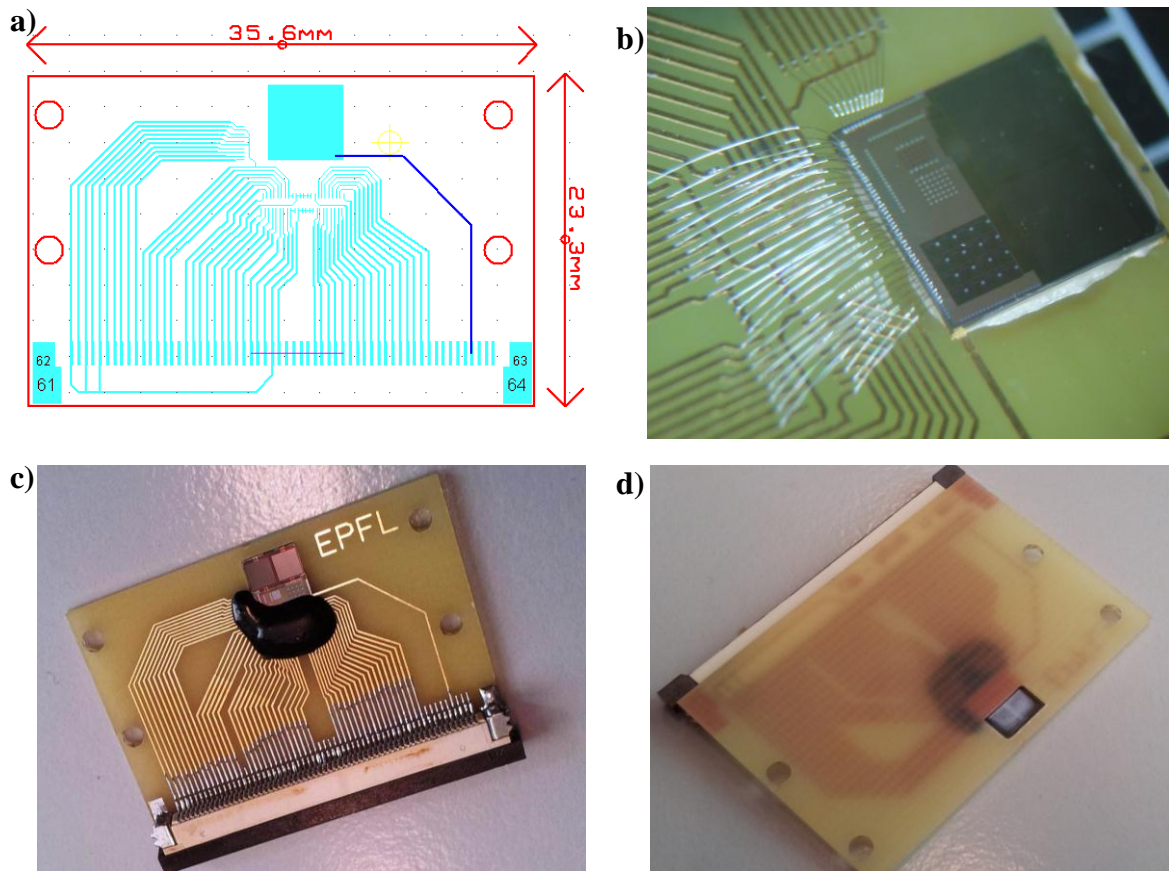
(a) Designed PCB for wirebonding. (b) Image of wirebonded test chip. (c,d) Wirebonded post-processed chip to PCB with hole.
